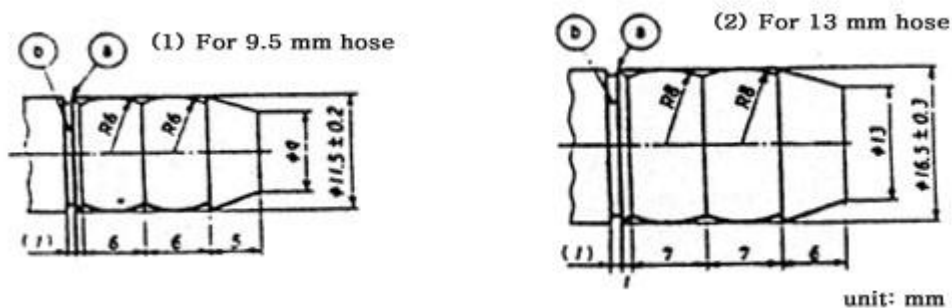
Shape and Dimensions of Hose Connectors
